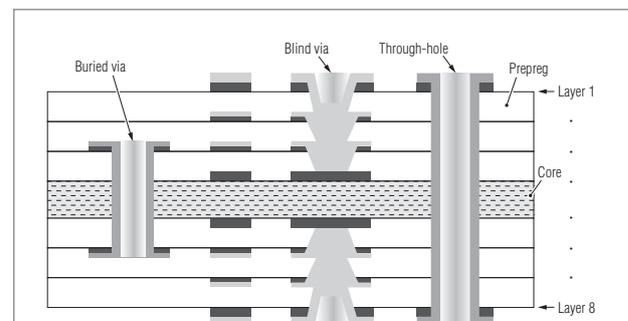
Cross-sectional outline of built-up multilayer printed circuit board (PCB) —
